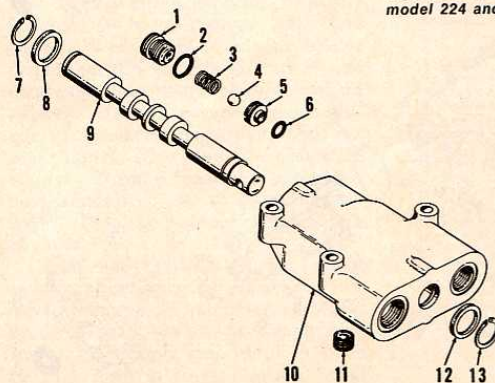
Exploded view of early Dukes single spool control valve used on early model 444 tractors.
